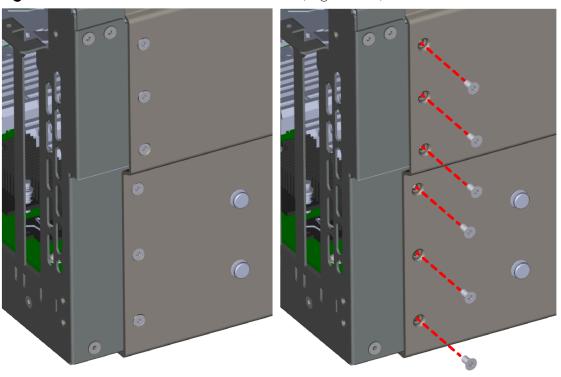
Rear Bulkhead Chassis Screws (Right Side)
